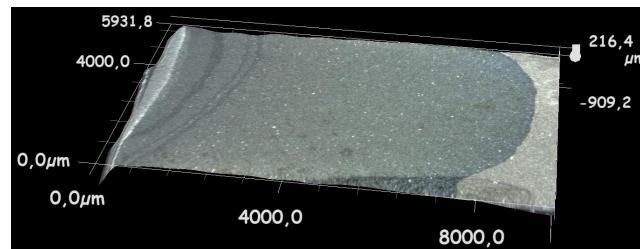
Fractography of a 6 mm-thick SEN-T specimen made of N18 subjected to dwell-fatigue loading at 550°C.
